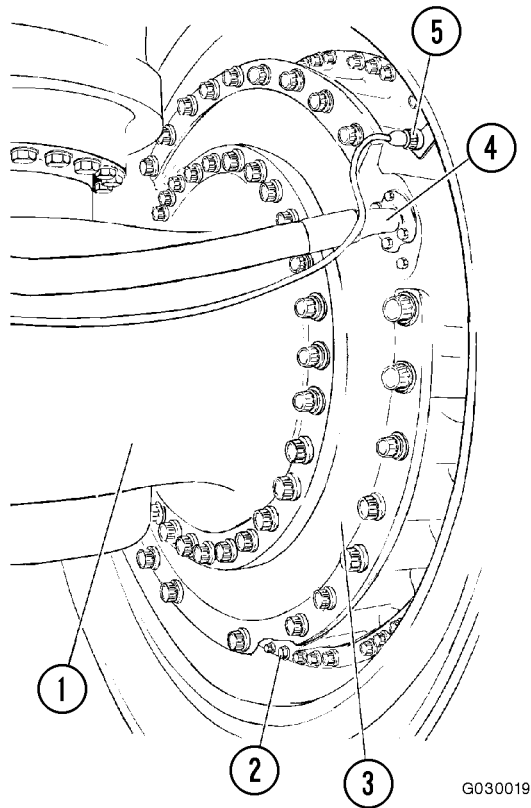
FRONT WHEEL & SPINDLE REMOVAL
